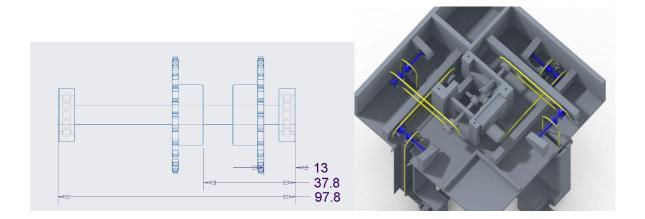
left: Turn shaft drawing (all dimensions in mm) right: Turn shaft placement in shell (blue)
